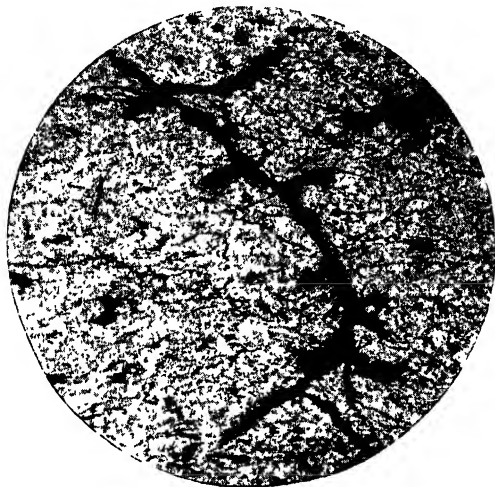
FRACTURE IN ACETYLENE WELD THROUGH HAMMERING AT TOO LOW A TEMPERATURE
